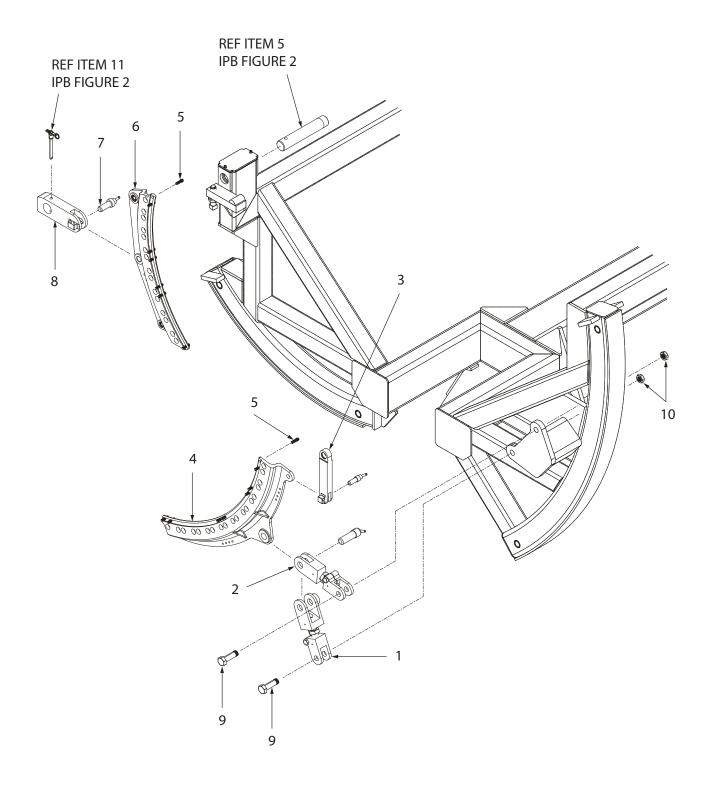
AGSE-E18414-S01 FWD Engine Support Assembly
